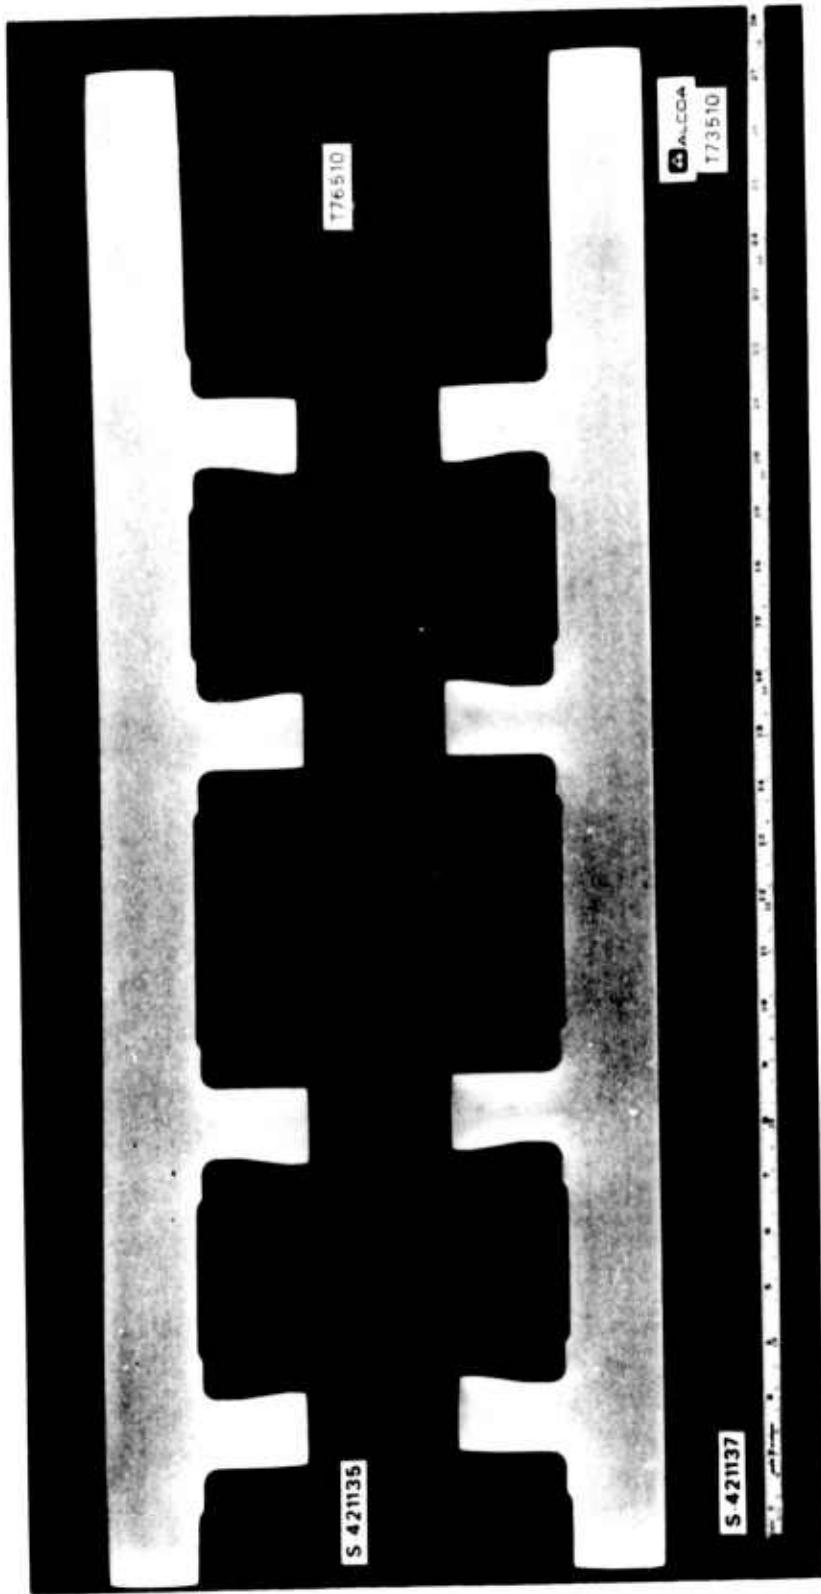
Macroetched Cross Sections of Alcoa Section 900102
